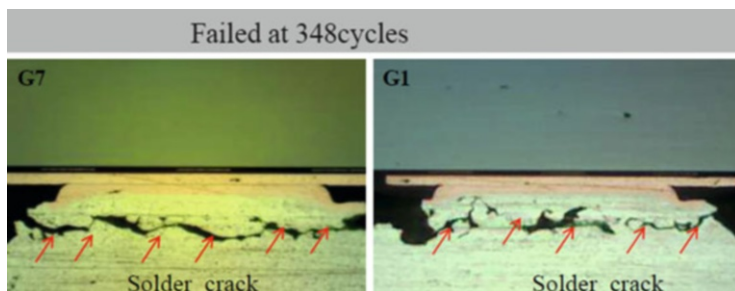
Solder joint thermal cycling failure of 2Cu1Pi design
